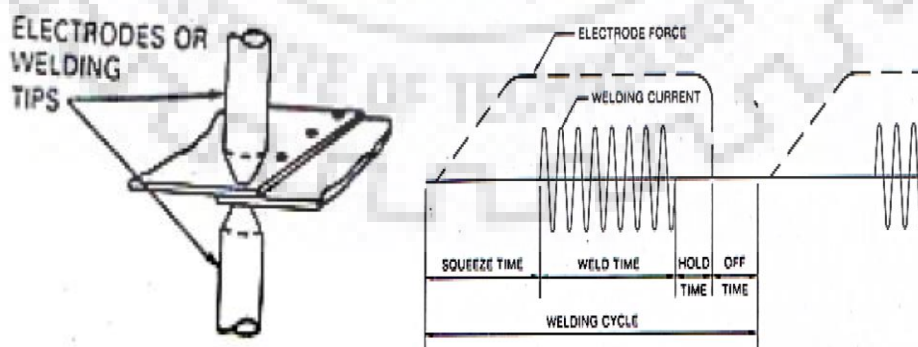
Resistance spot welding (Keran, 1980) [1]. Fig. 2 Basic weld cycle for spot welding (Keran, 1980) [1].
